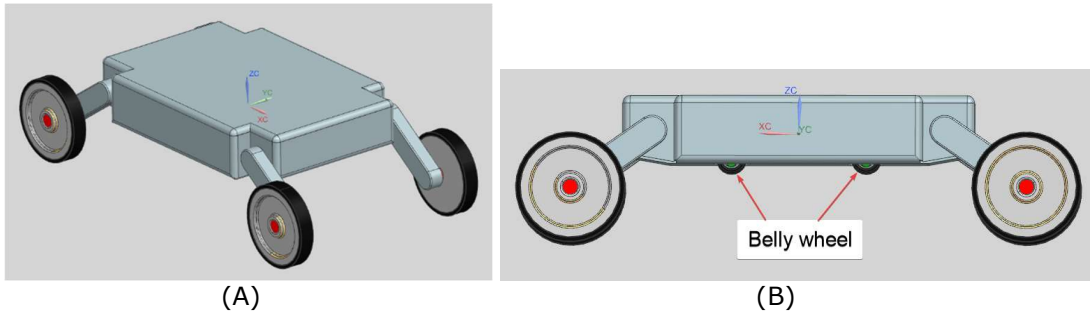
ISO view (A) and side view (B) of 4-wheeler
